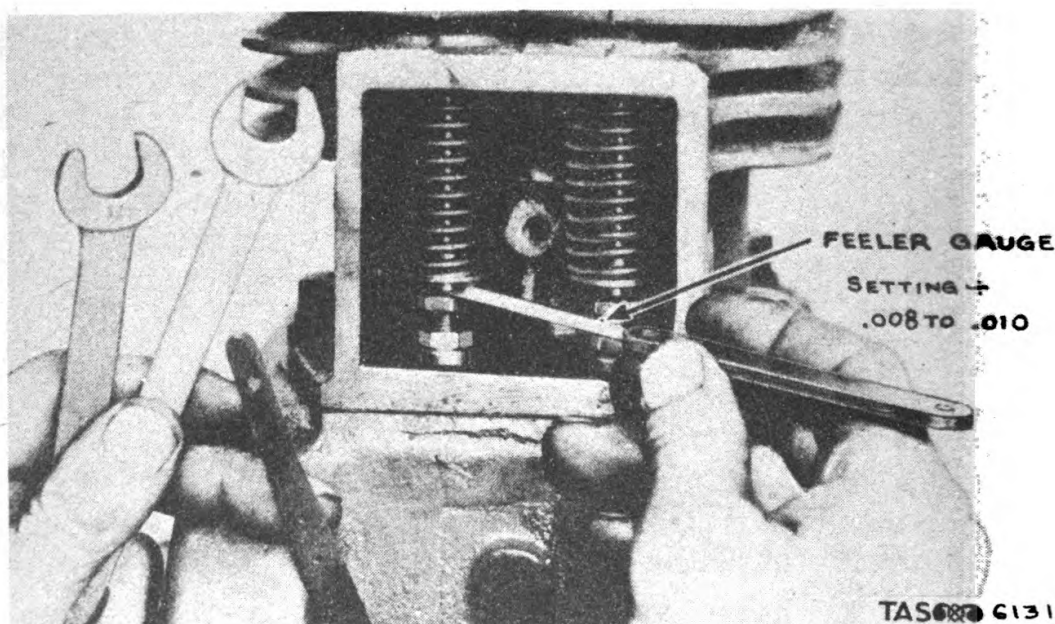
Inserting Feeler Gage to Determine Tapper Clearance.
